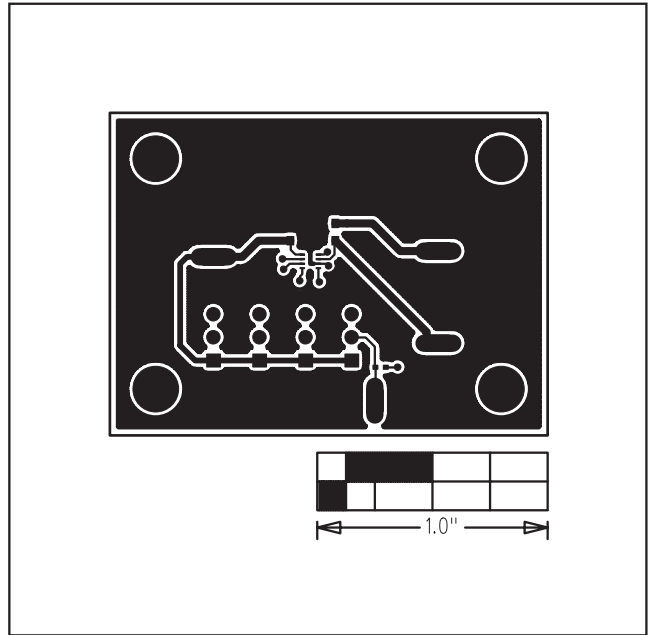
MAX8633 EV Kit PC Board Layout—Component Side
